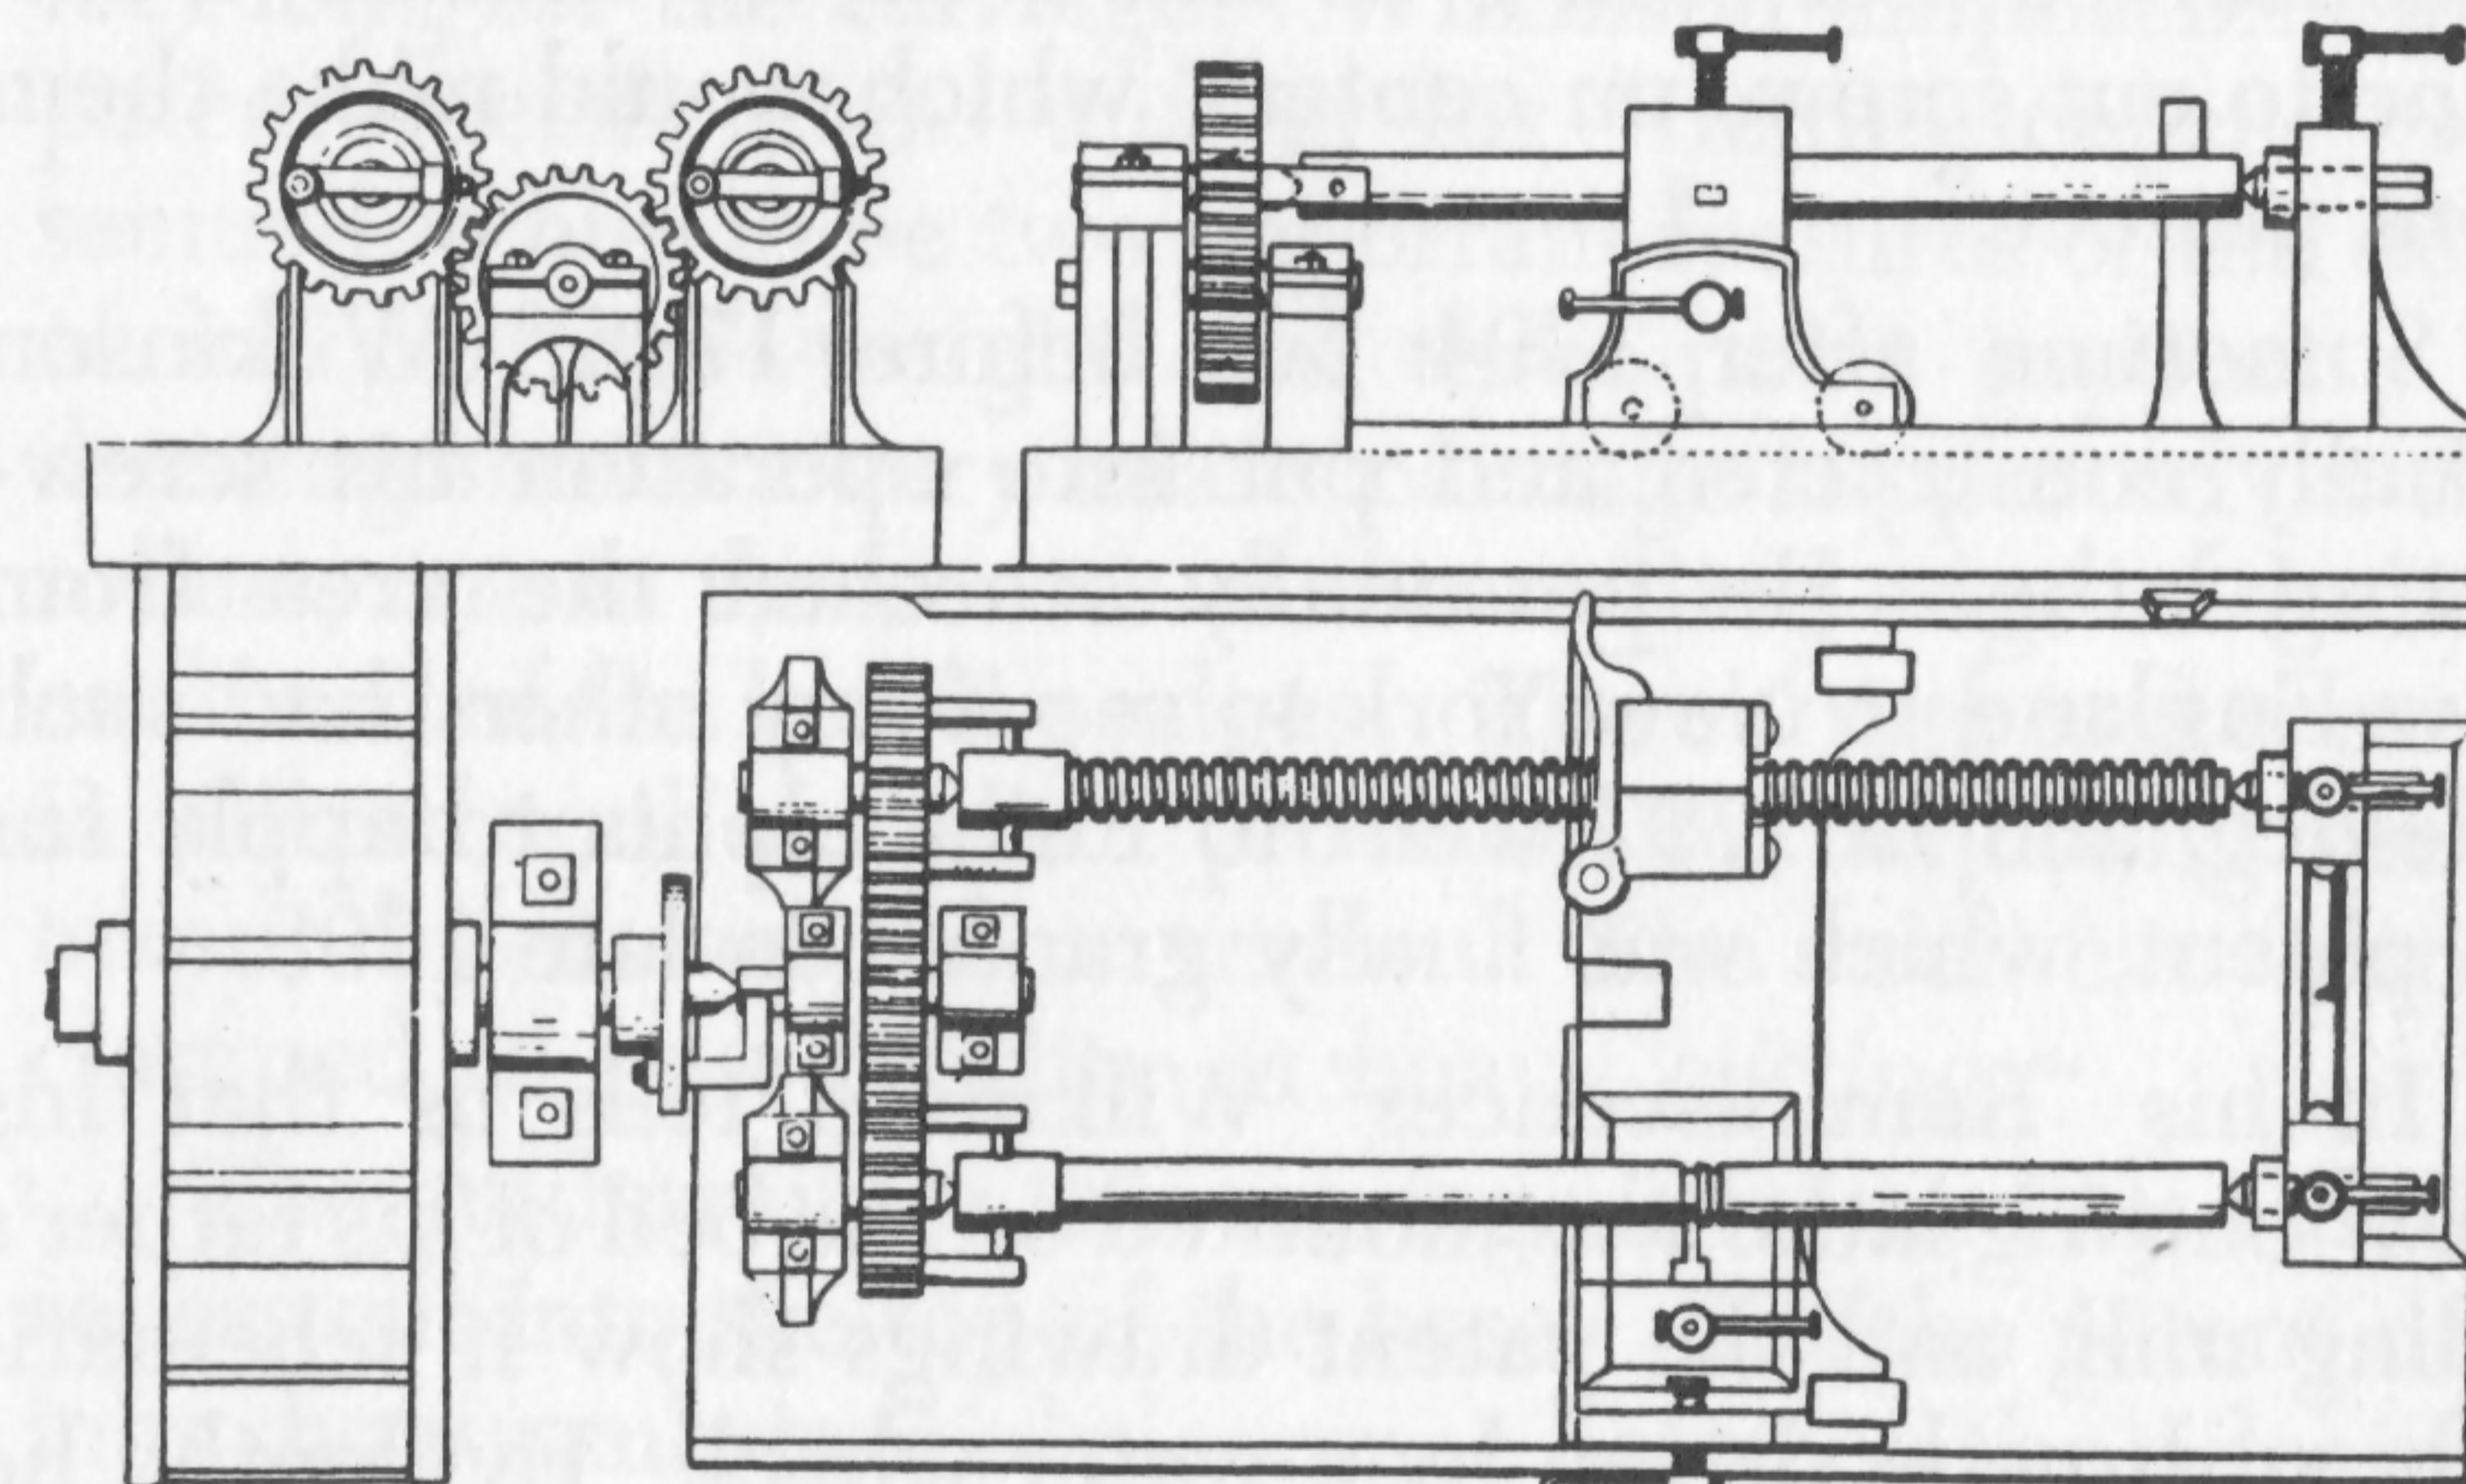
WILKINSON'S SCREW-CUTTING LATHE, 1798.
